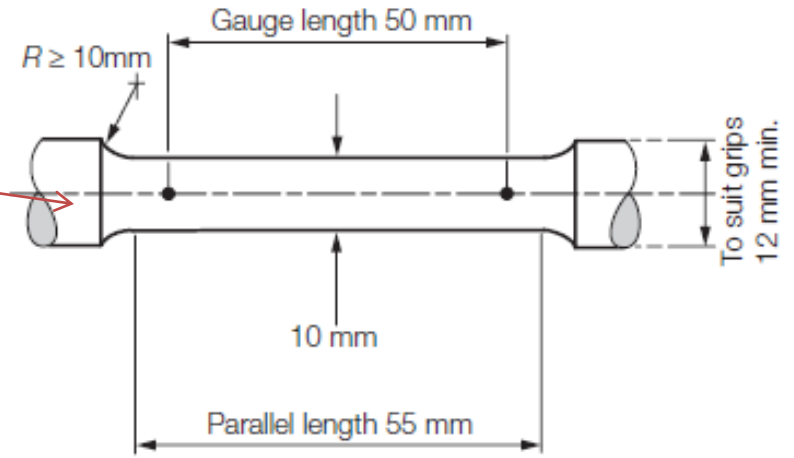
Test specimen for deposited weld metal tensile
